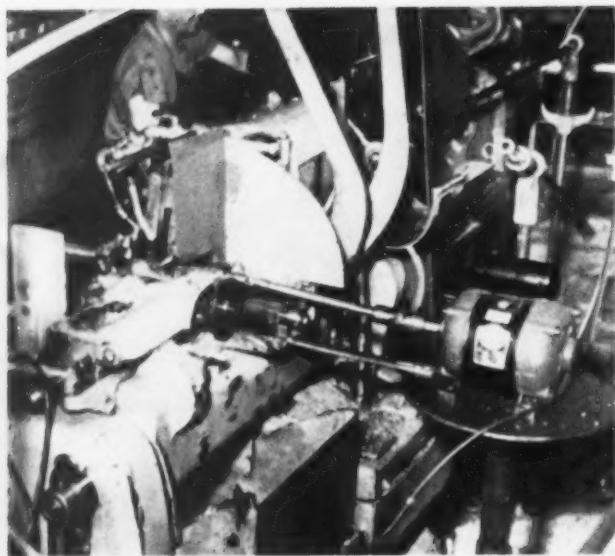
Motor stand type of auxiliary drive for actuating cross drills and cross milling and turret attachments on screw machines
